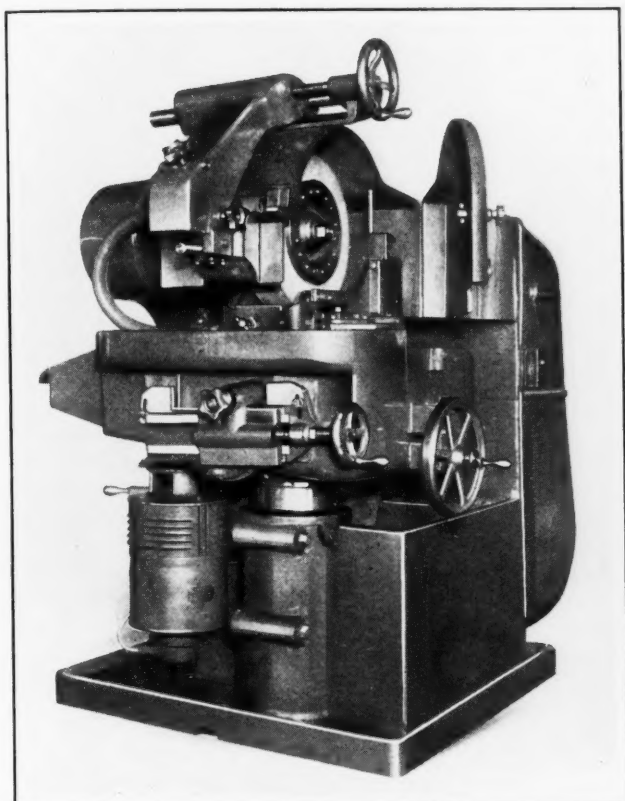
Detroit Centerless Grinding Machine of Improved Construction
